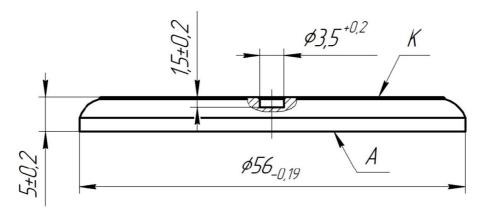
Dimensions of D056-9500 welding diode in housingless design
